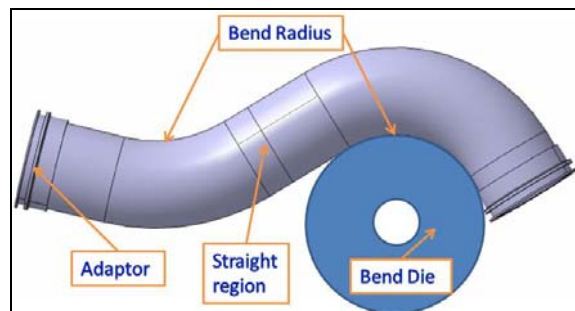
Pipeline Assembly simulated for CNC pipe bending.
